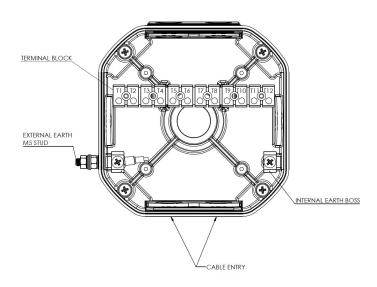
Entry Unit (Beacon 1) Internal Detail & Terminal Block
